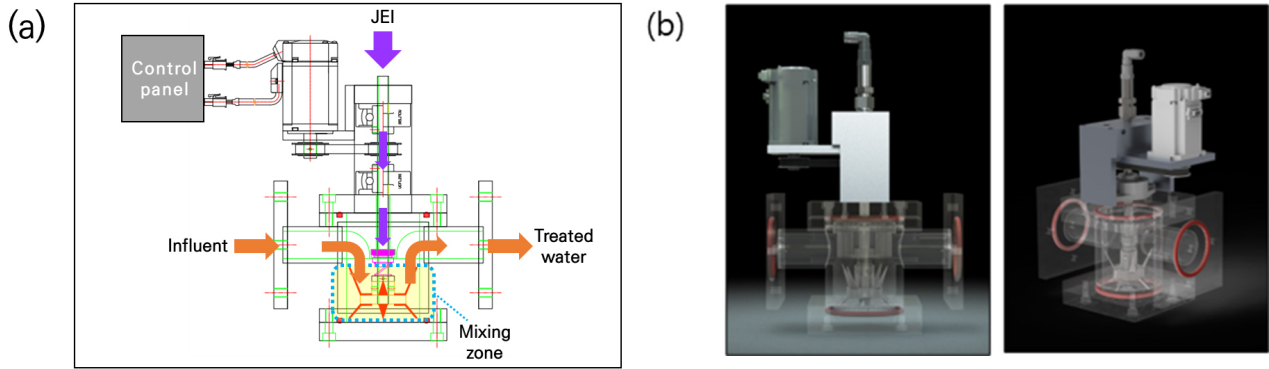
Design drawing of the active tube connection mixed system. (a) two-dimensional drawing and (b) three-dimensional drawings.
